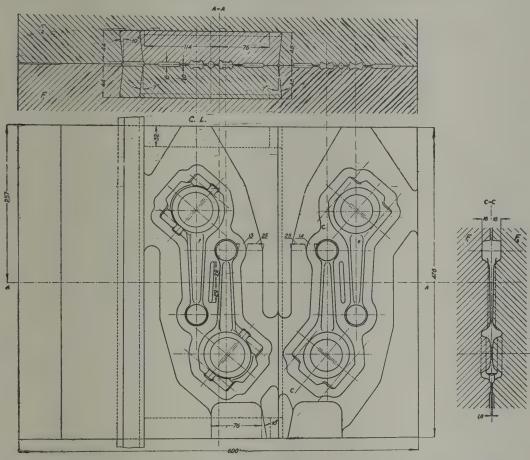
Die with final impression design for production of standard motor car connecting rod
